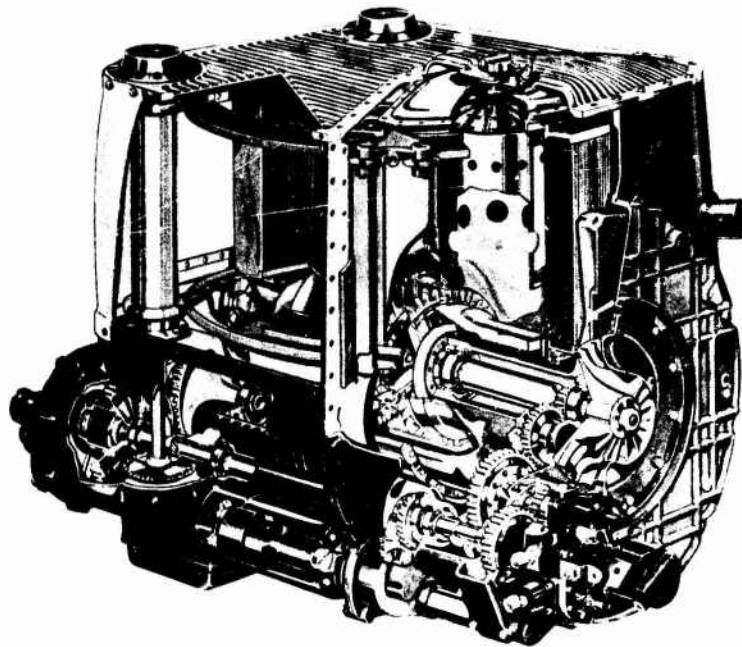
Cutaway View of GMC GT-309 Turbine Engine, Showing Horizontal Rotating-Drum Metal-Matrix Heat Exchanger
